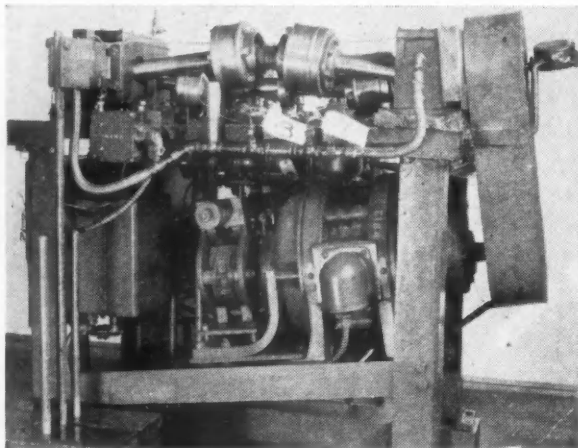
Side view of gear tester showing drive shafts, motor, brake, weight, arm, etc.
